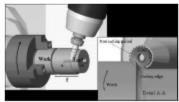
Illustration of the process machining lathe with rotating cutting tools
